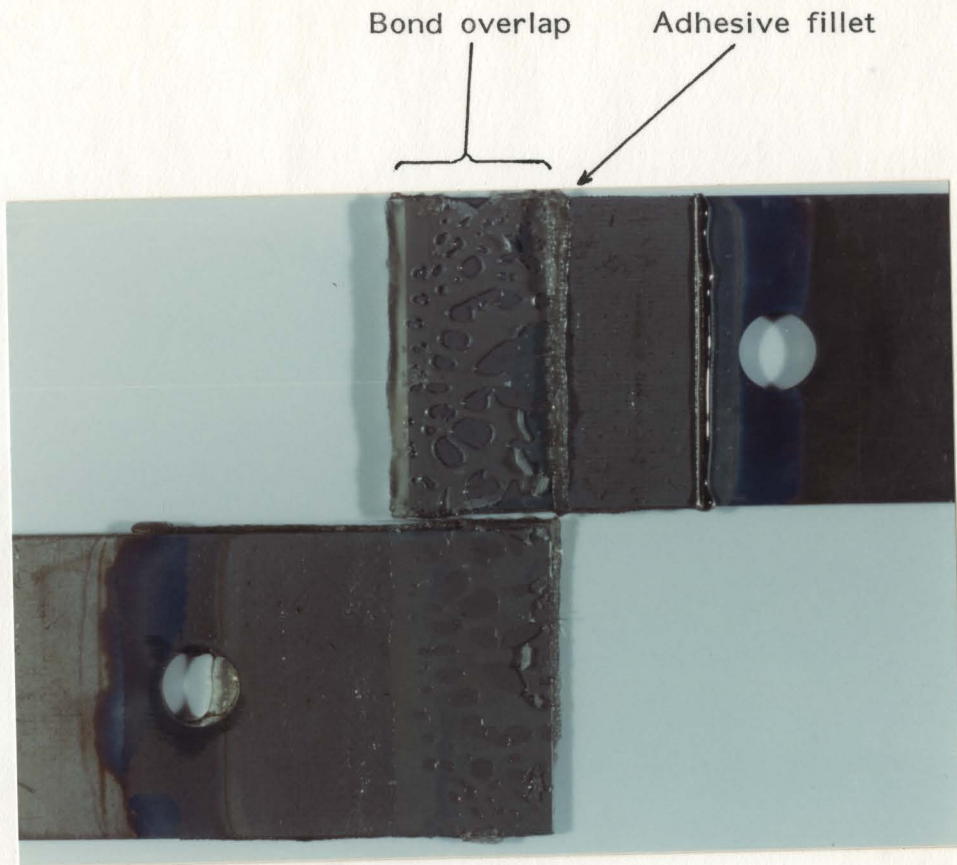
Photograph of a Fracture Surface for a Single Lap Bond Illustrating Apparent Failure II.
